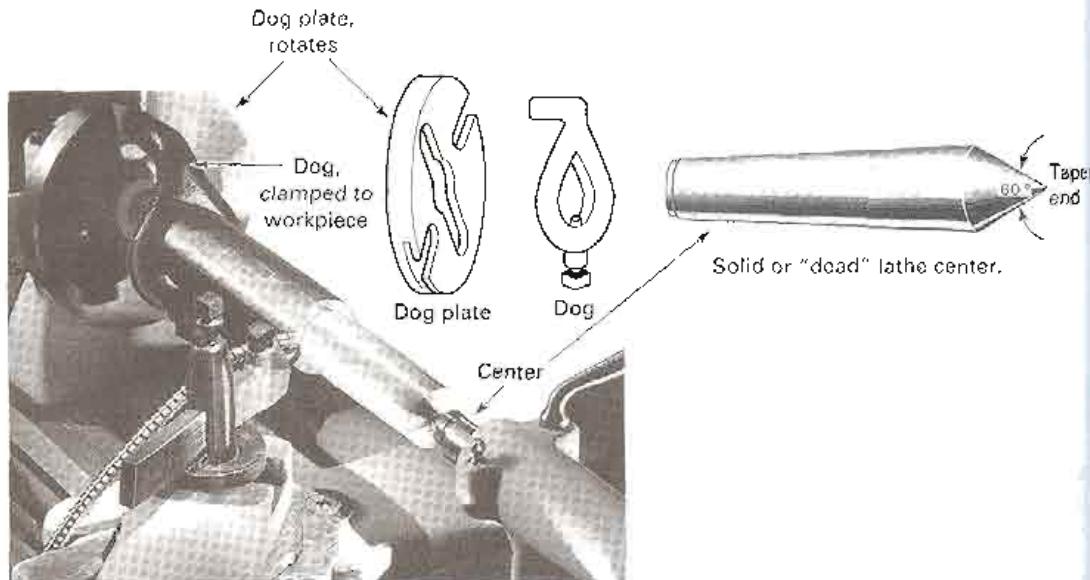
Work being turned between centers in a lathe, showing the use of a dog and dog plate. (Courtesy of South Bend Lathe.)
